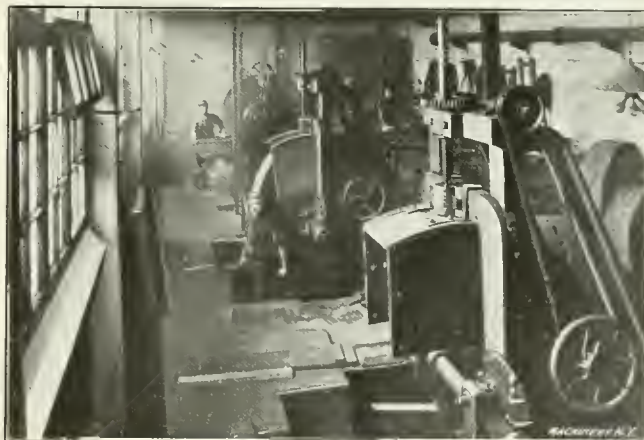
Grinding by Machine, which takes the Place of the Older Method, giving Truer Surfaces
